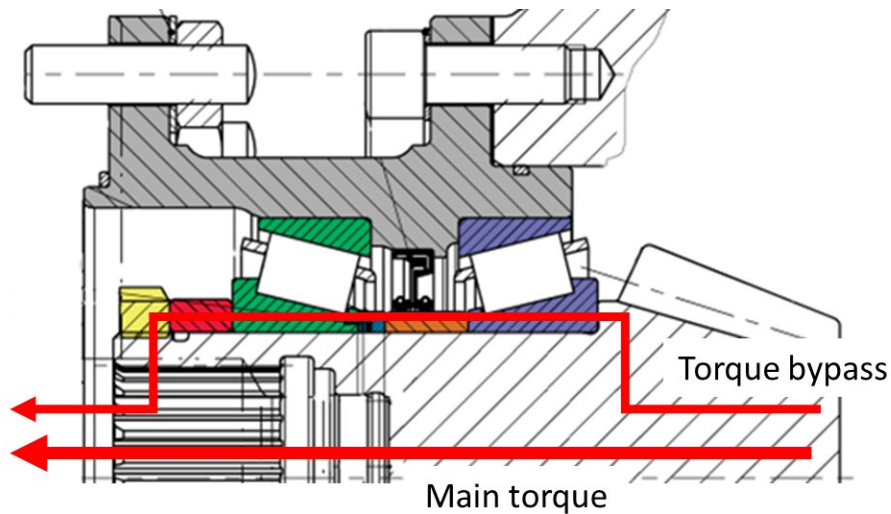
Torque bypass between the head and the tail of the pinion shaft
